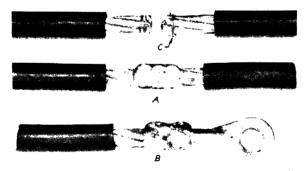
A fused copper cable splice (A) and a cable to lug joint (B). The cable is prepared by removing the insulation and wrapping #14 wire (C) to keep the strands in place during the welding operation
